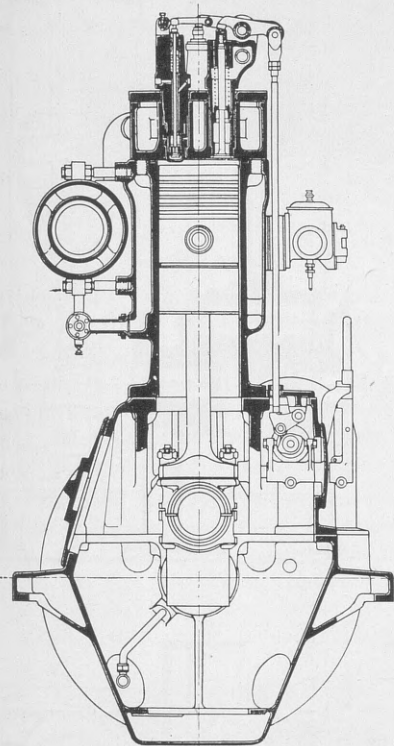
General assembly and sections of the Deutz-Brons engine
